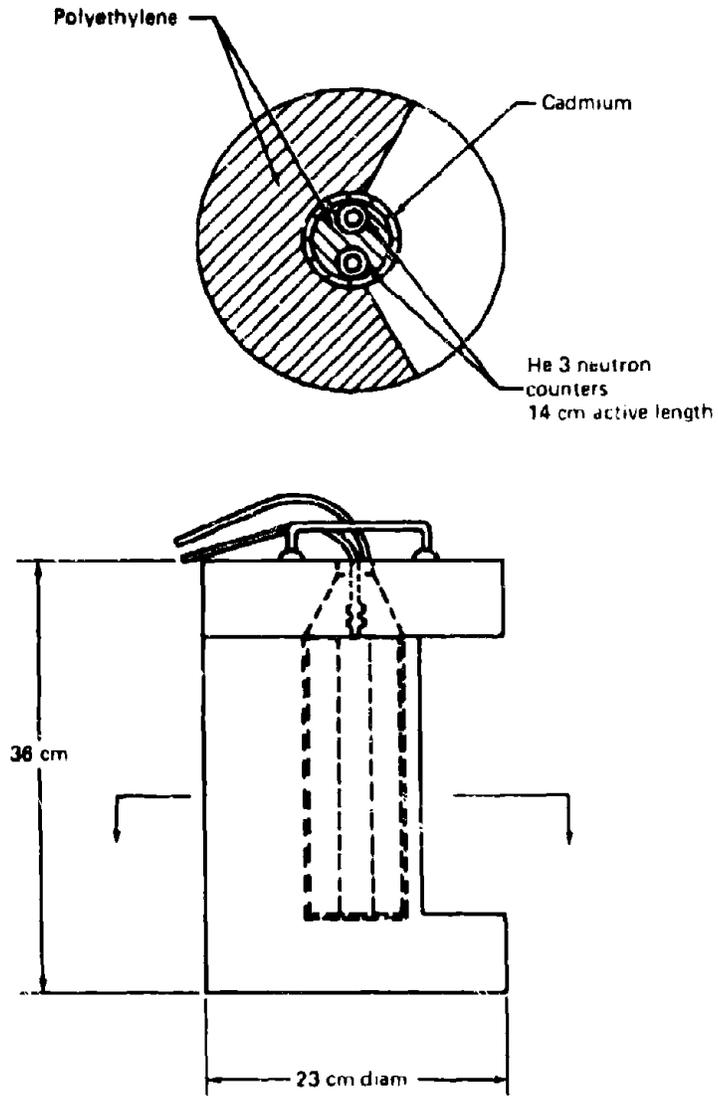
Assembly drawing of the portable SNAP detector (Ref. 62).
